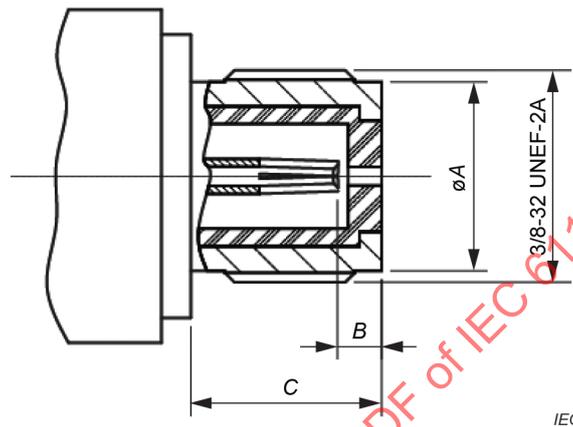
Satellite broadcasting “F” socket (for dimensions, see Table B.1)
